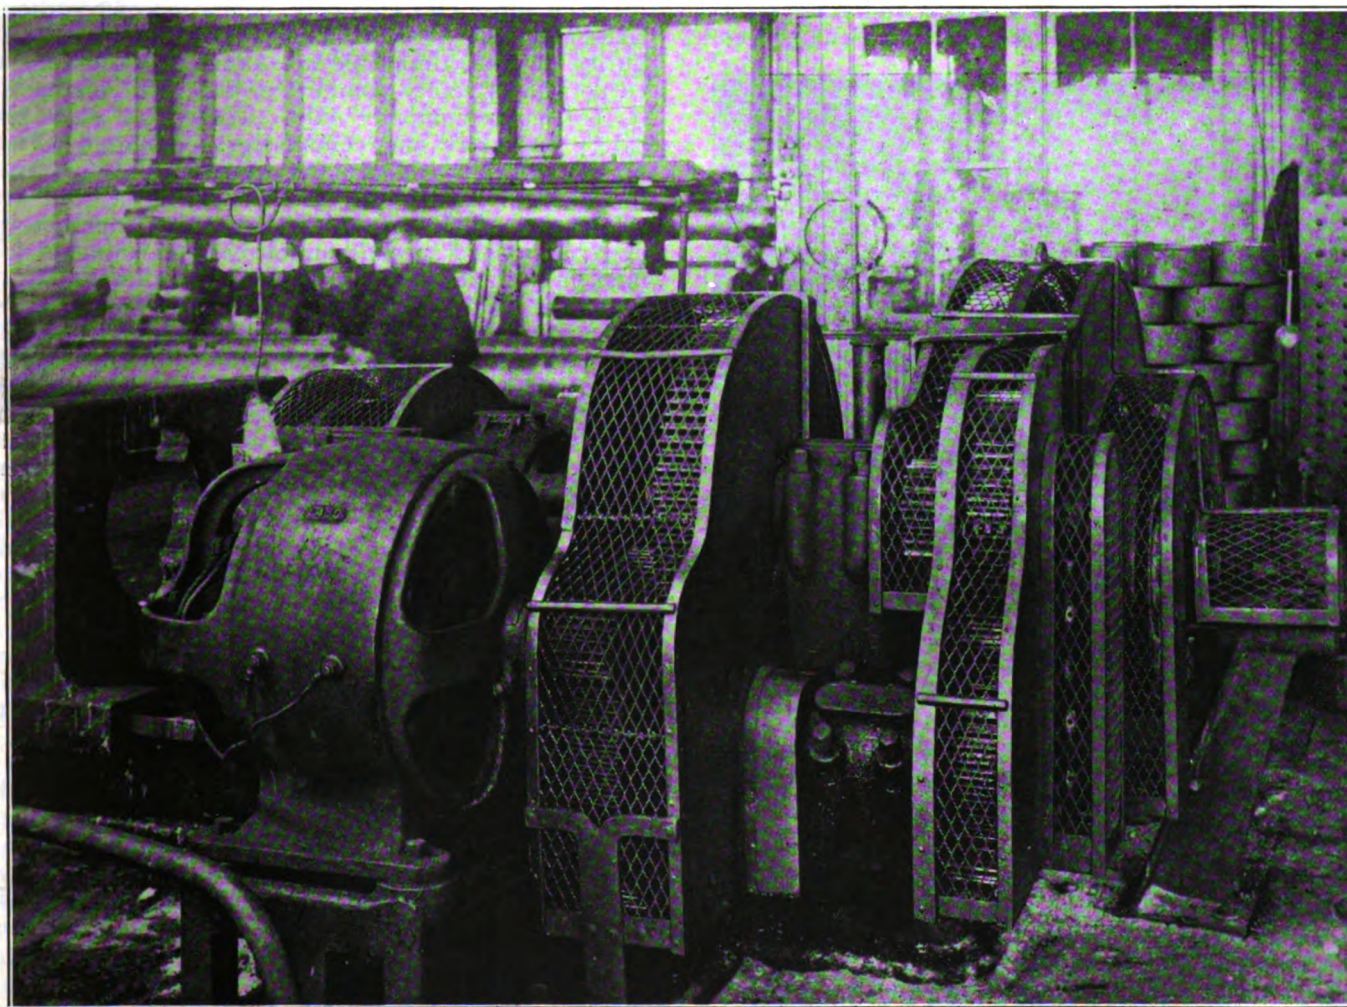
Showing guards over lathes on pipe mills, National Tube Company.
